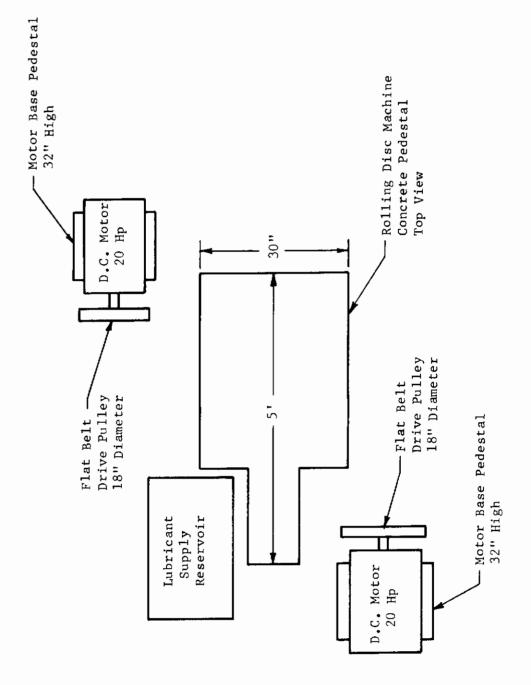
Top View of Rolling Disc Machine Base and Motor Drive Layout
